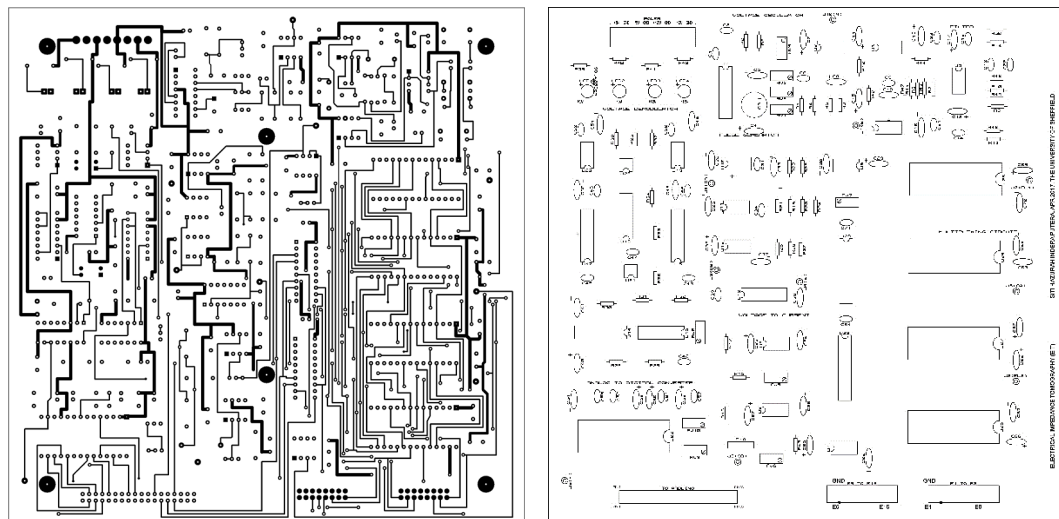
Bottom copper of printed circuit board and top silk for printed circuit board
